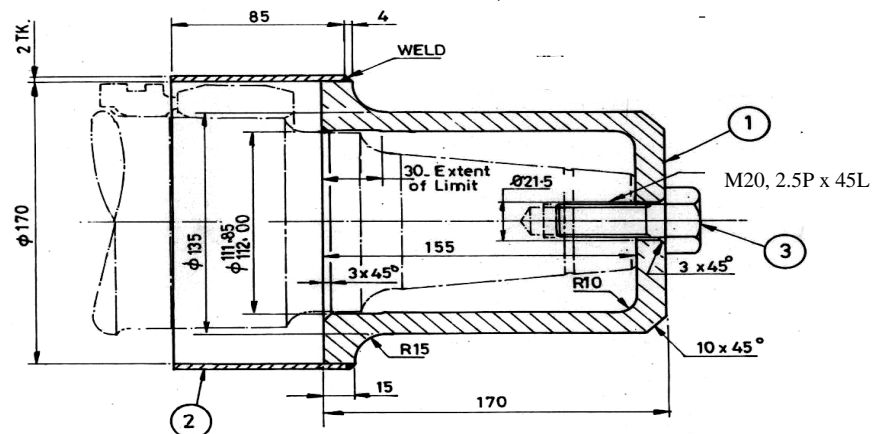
PROTECTING SLEEVE FOR PE BEARING (TOOL NO. 1405400)
